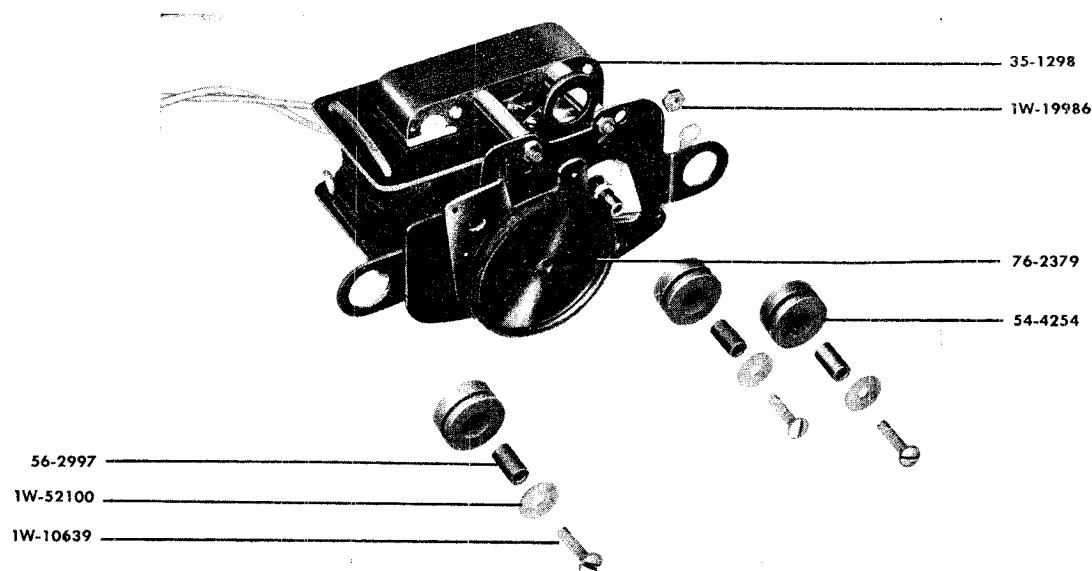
MOTOR AND IDLER-WHEEL ASSEMBLY,
